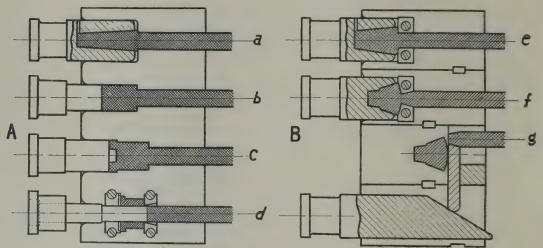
Typical examples of the dies for producing small forging: A—Die for production of small bush; B—Die for production of bevel gear blank: (a) First upsetting; (b) Second upsetting; (c) Final forming; (d) Shearing off the forging from the bar; (e) First upsetting; (f) Final forming; (g) Cutting off the forging from the bar by vertical cutter
